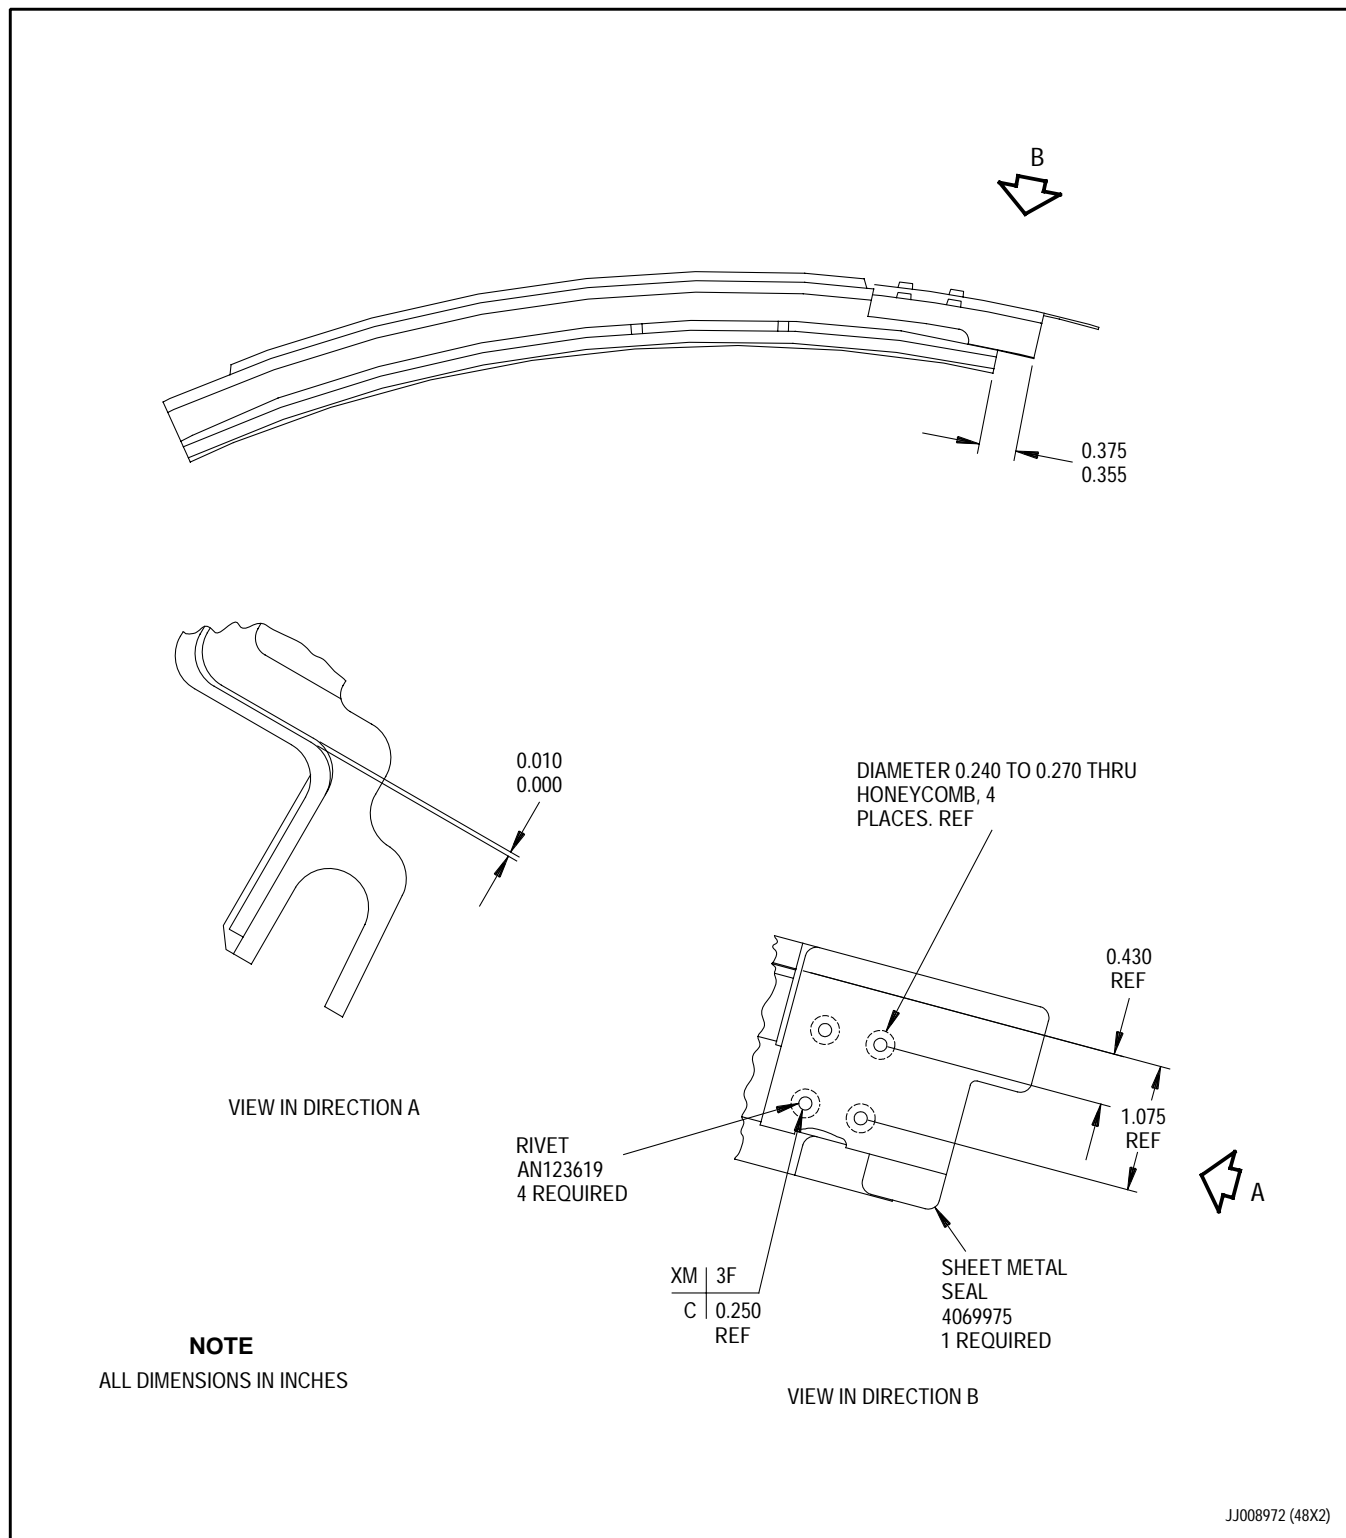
Third Stage Turbine Air Sealing Ring Segment Assembly - Seal Replacement
